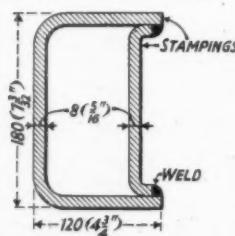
Cross section of bogie side frame in the plane of the elliptic springs
